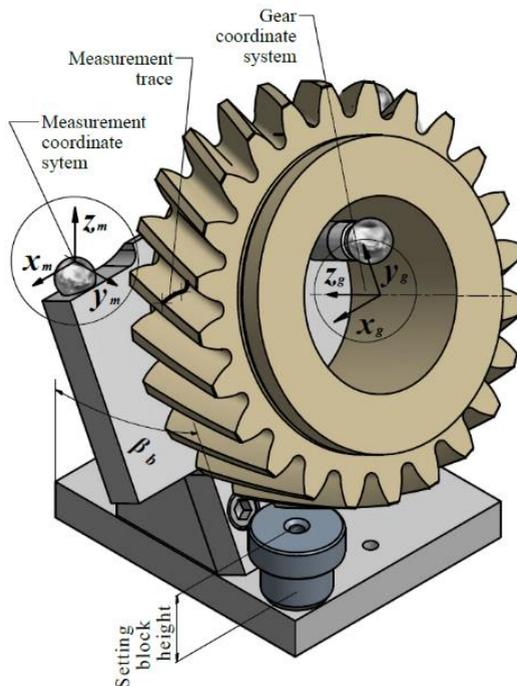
Example fixture to approximately align the gear surface with the measuring instrument co-ordinate system.
